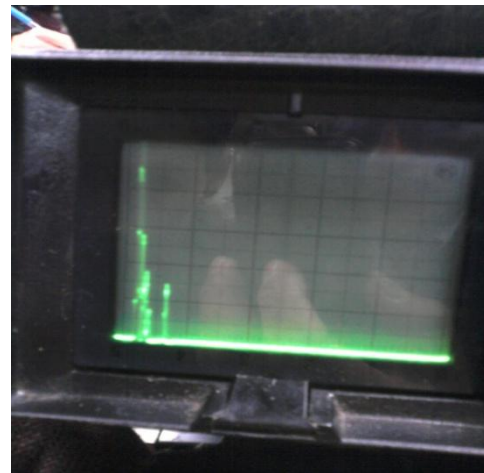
Internal cracks for weld joint welded by wet electrode rods.
